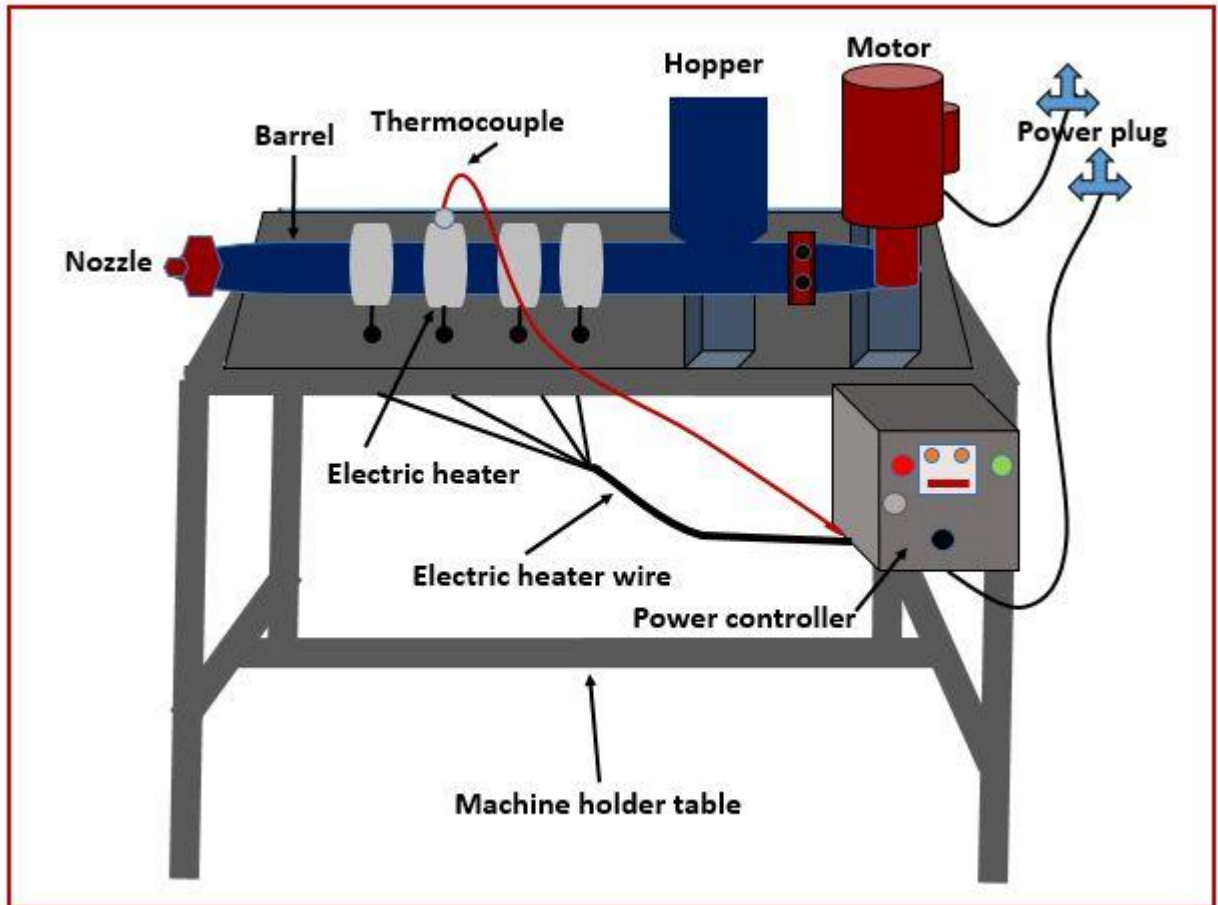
A block diagram of Extrusion Molding Machine (EMM).
